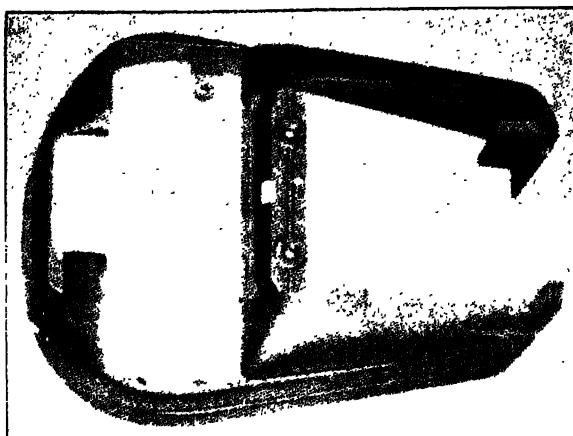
Cold-chamber pressure casting of magnesium alloy for business-machine housing. Note thin sections and fine surface finish.
